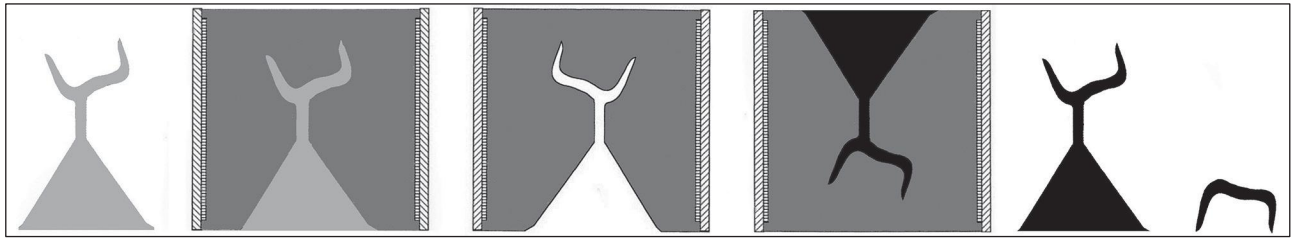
Structural material casting scheme: wax pattern of artificial crown with gating system mounted on the casting cone (a), mold making from refractory material (b), mold prepared for casting after wax pattern melting (c), filling the refractory mold with molten structural material (d), mold freed casting (e), and artificial crown separated from gating system
